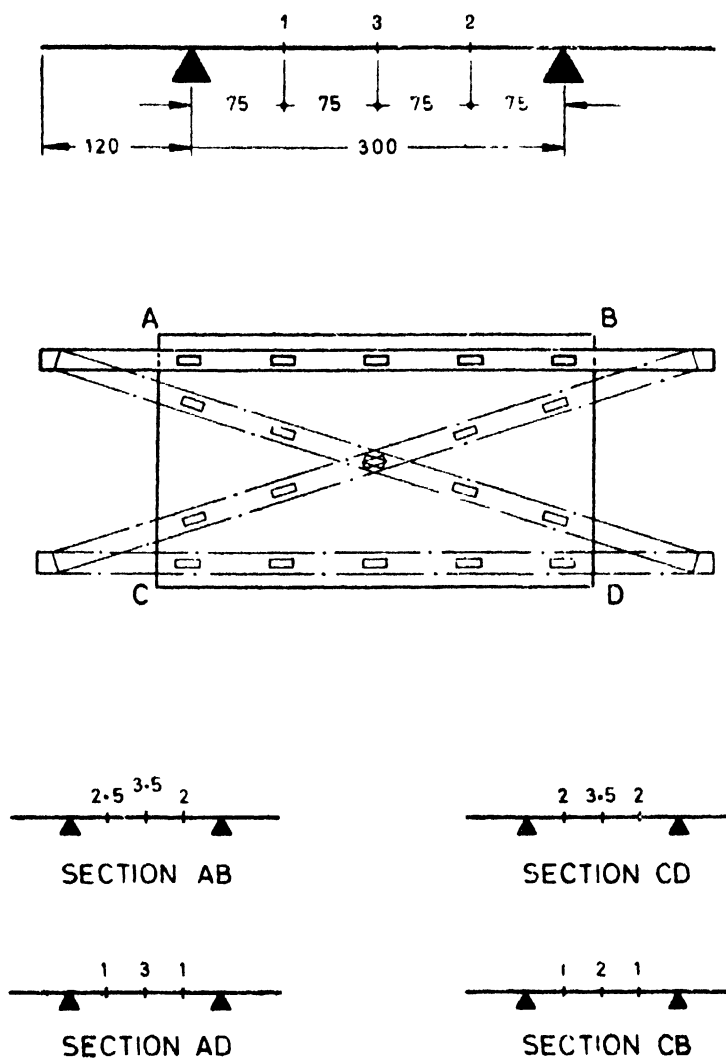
STRAIGHTEDGE METHOD OF TESTING FLATNESS
